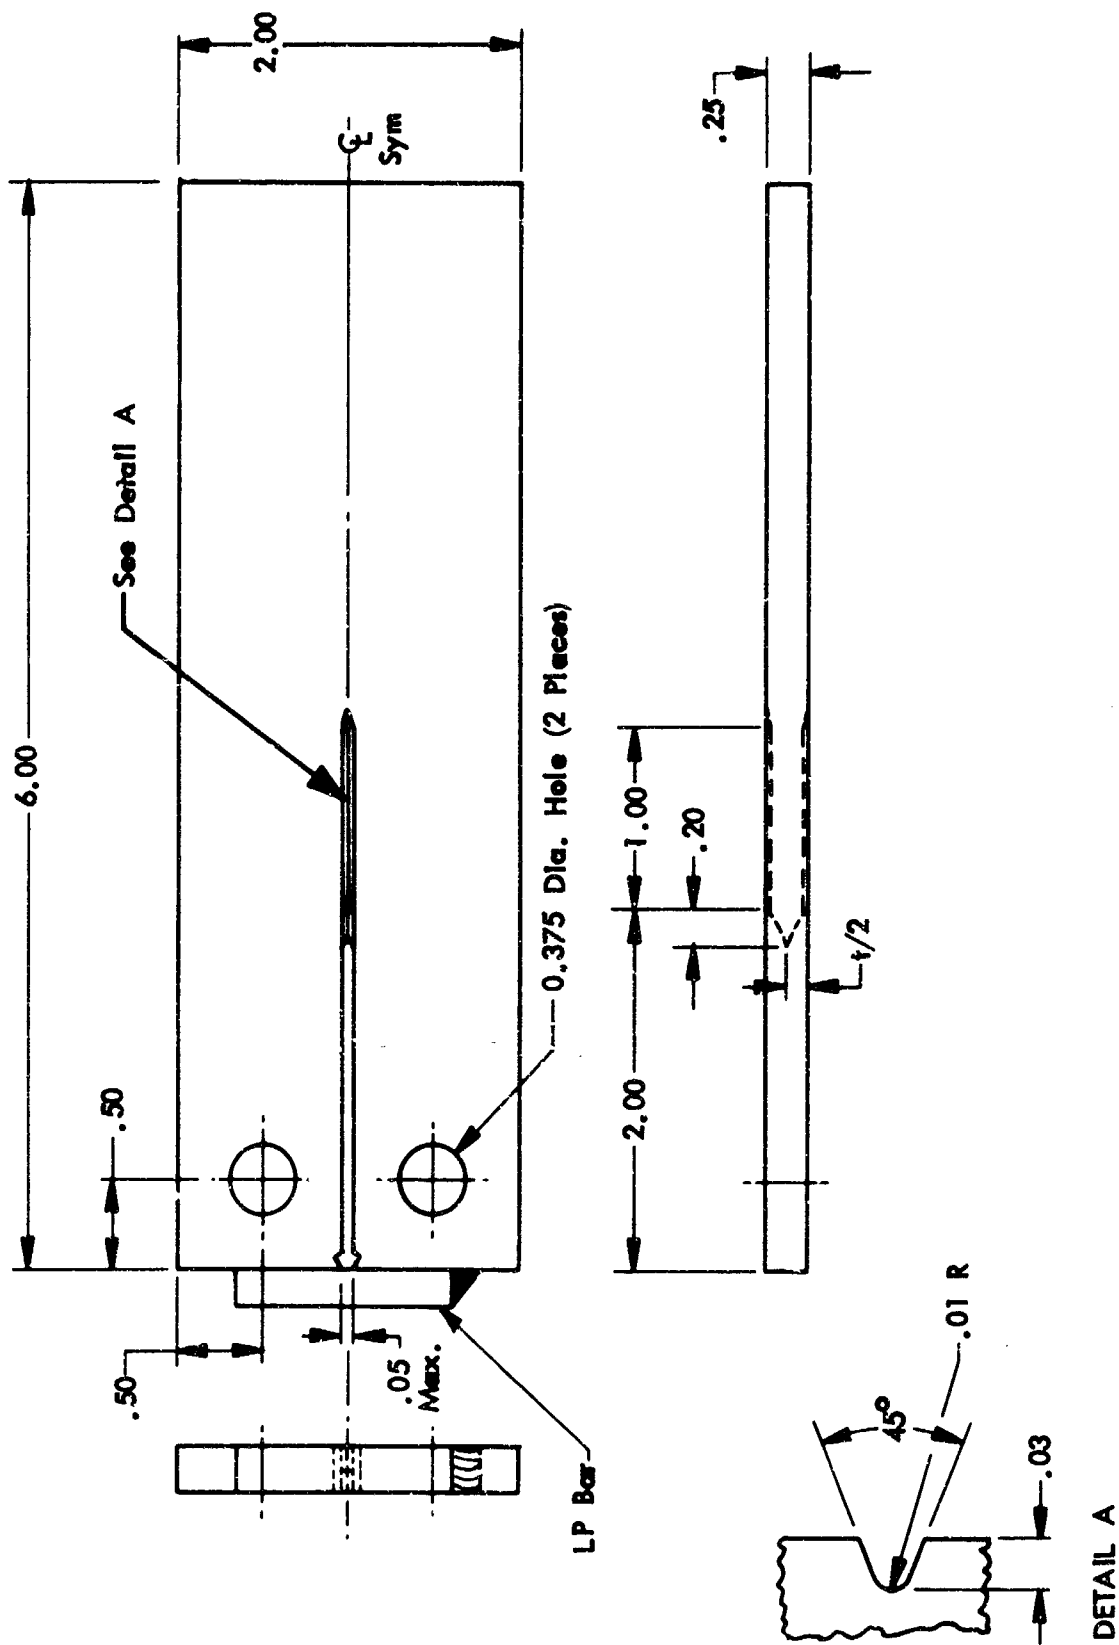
GROOVED DOUBLE CANTILEVER BEAM SPECIMEN
